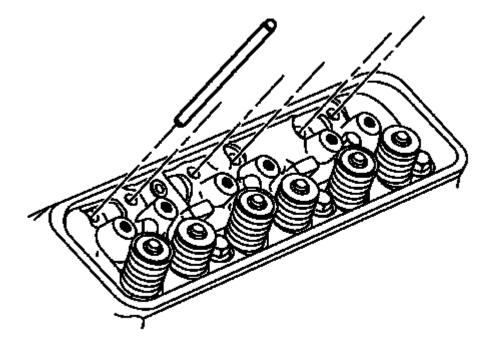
View Of Valve Pushrods Courtesy of GENERAL MOTORS CORP.
